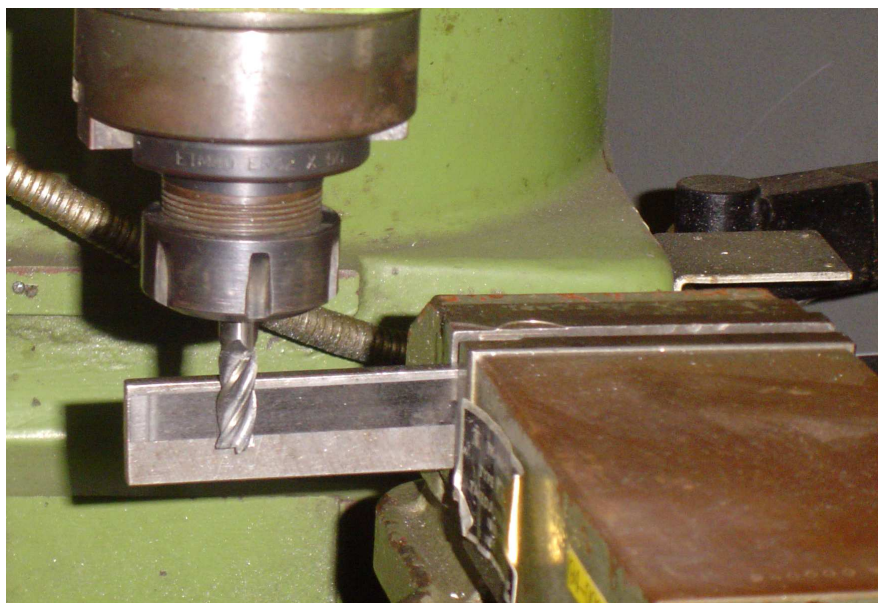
The composite adherend and the backing metal plate held in the vice of the milling machine and the workpiece was fed at desired angle during scarfing process.
